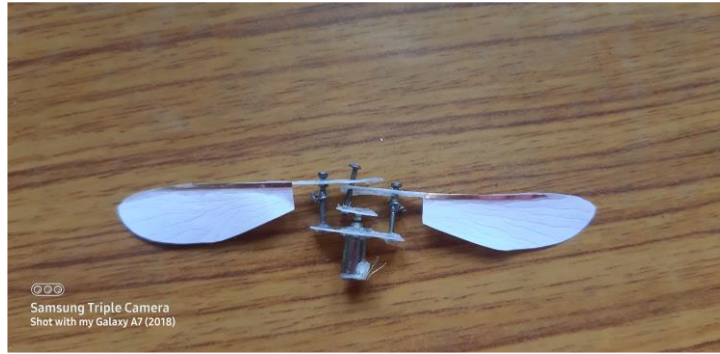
Paper Wings Attached to the Handmade SC-SDL Mechanism Design
